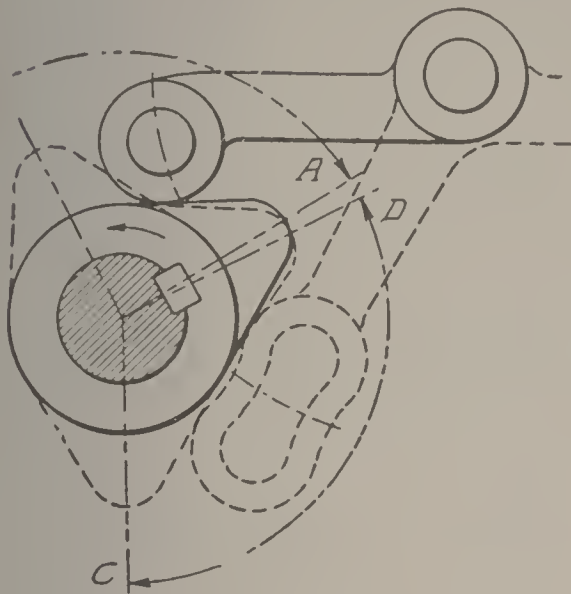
Cam Mechanism of Peugeot Single-Cylinder Engine
